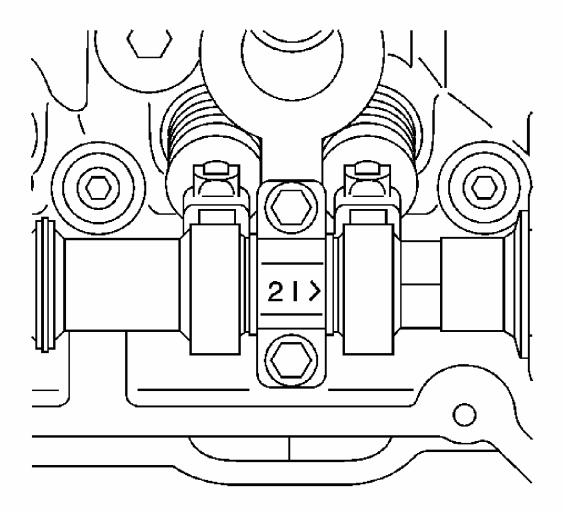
View Of Intake Camshaft Bearing Cap Markings Courtesy of GENERAL MOTORS CORP.
